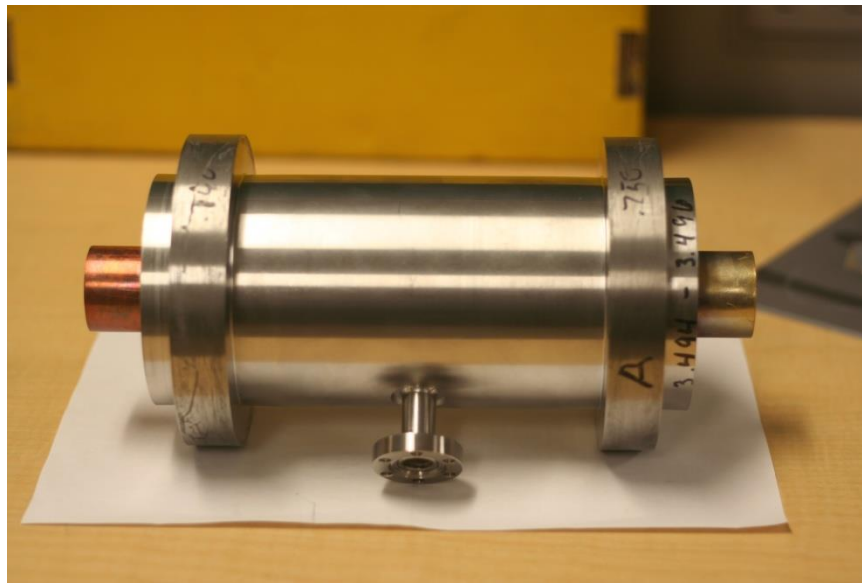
Shown is the complete Coupler Assembly after fabrication and hot testing.
